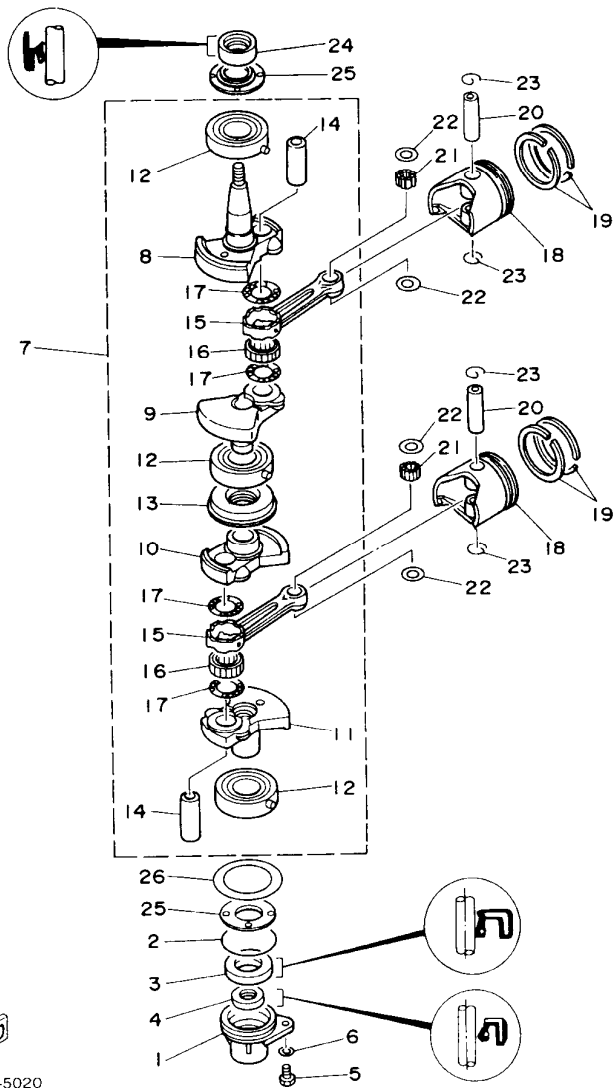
CRANKSHAFT. PISTON CIGUENAL. PISTON
